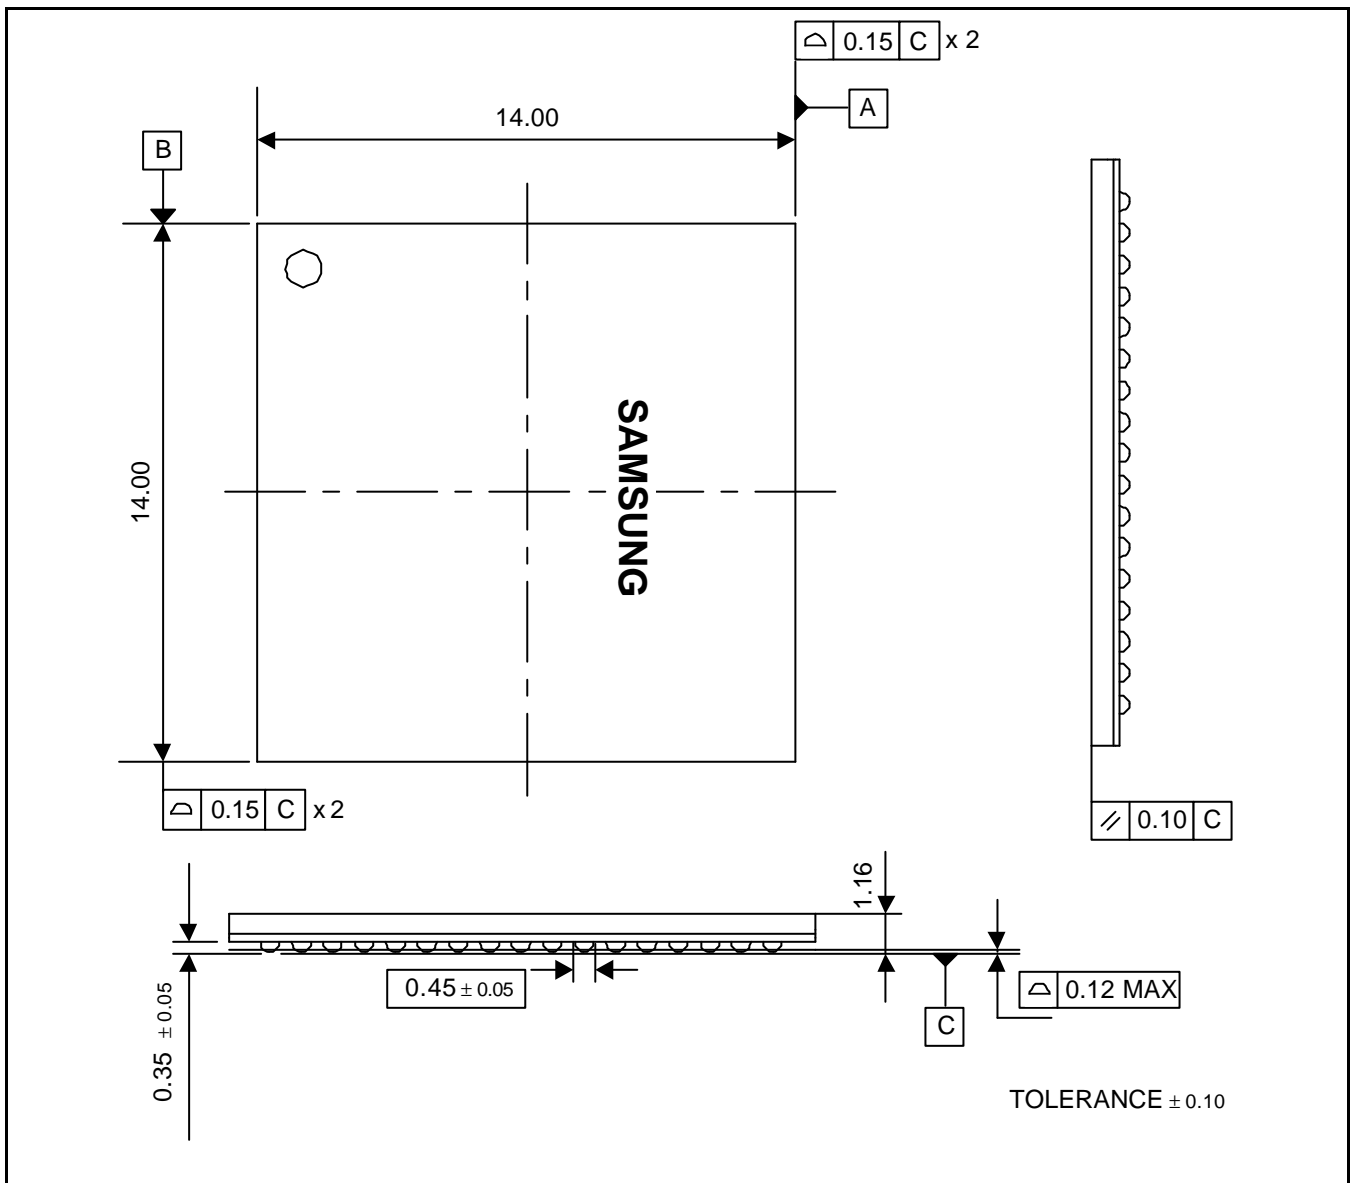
272-FBGA-1414 Package Dimension 1 (Top View)
